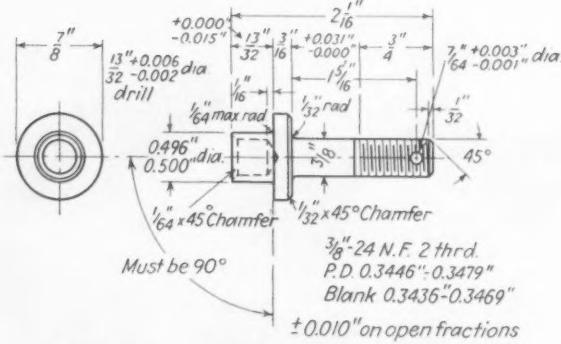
Cold headed bolt with special drilled head. Steel used is SAE 1020.
